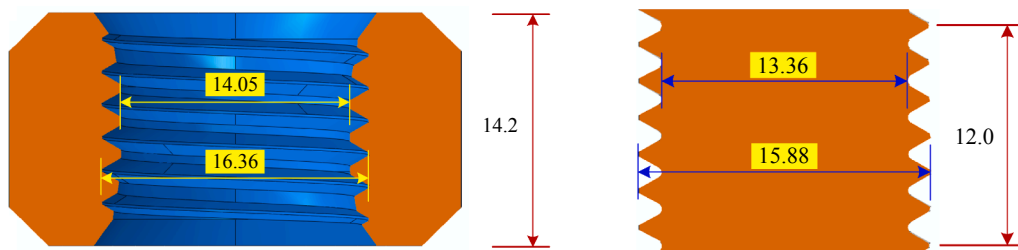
Measured dimensions of nut and bolt threads (according to [7,22]).
